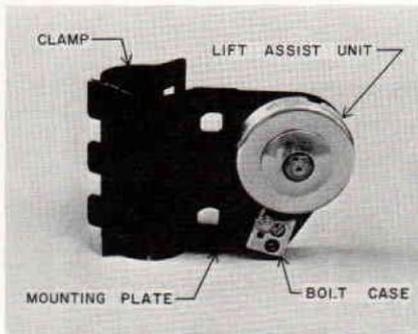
Partially assembled Pronator Assist showing the clamp, mounting plate, Lift Assist Unit, and bolt case.
